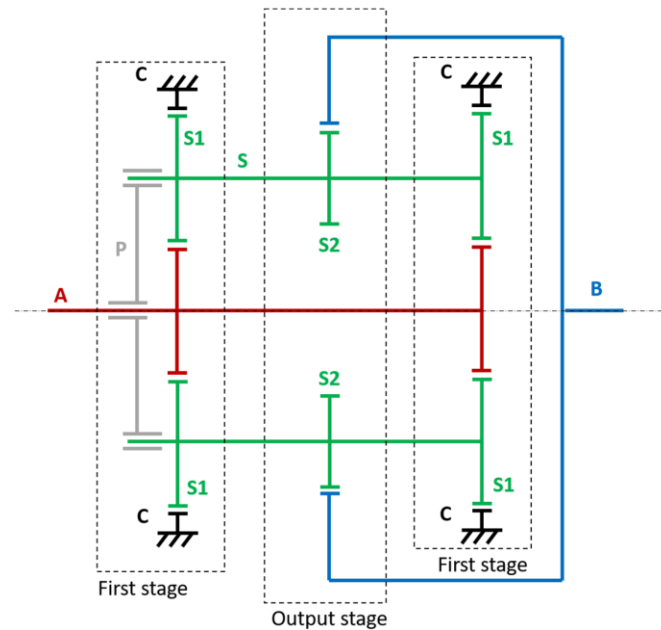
Section of the gearbox: input shaft (red), planetary gear (green), output ring (blue), mounting ring(gray)
